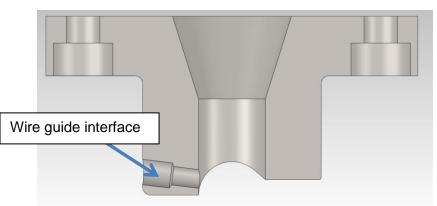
Cross section view of the conical hole and the Wire Guide interface
